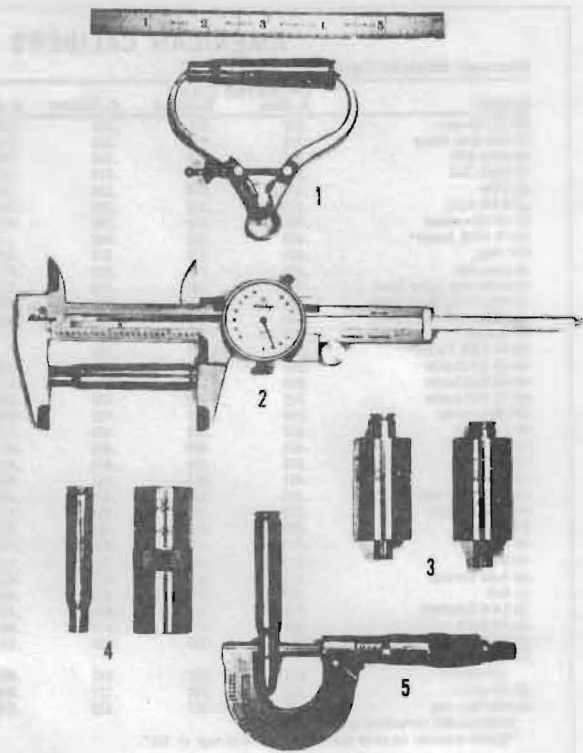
Case measuring tools: (1) steel scale calibrated in hundredths and common caliper, (2) indicating caliper with gauge for measuring overall length and inside and outside neck diameters, (3) trimmer shellholders, showing difference in case head projection before and after trimming, (4) typical case diameter gauge, and (5) micrometer for checking neck diameter. (Courtesy The American Rifleman)
